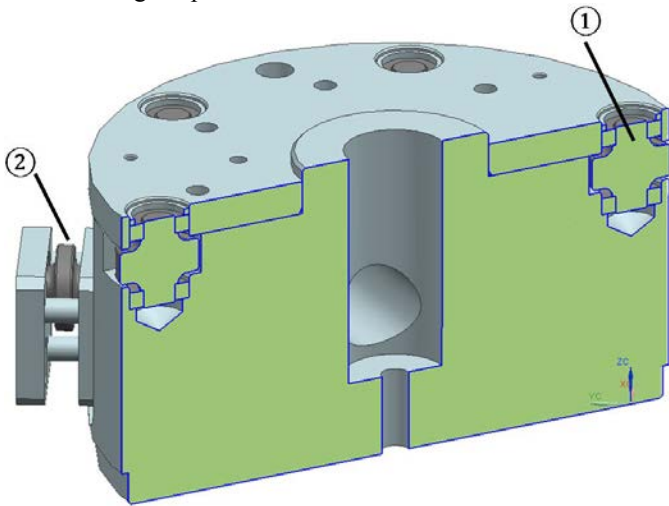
Cross-section of the lower BB plain of improved bearing BB system for the IMS Flywheel. ①: RRD with rolling element bearing for radial support; ②: RRD with rolling element bearing for axial support
